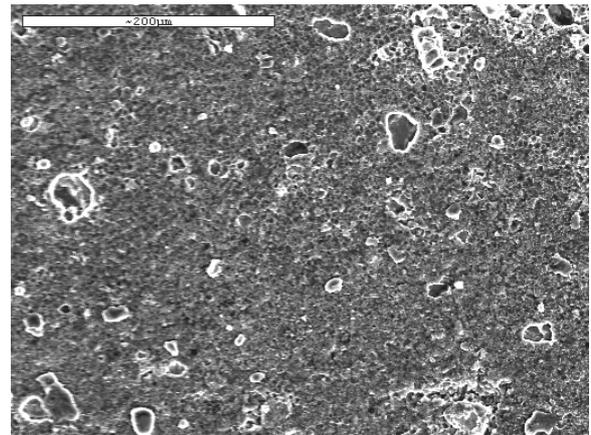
Tensile test fracture topography of butt welded joint for investigated AMCs reinforced with 5 % of Ti_3Al , - detail A
